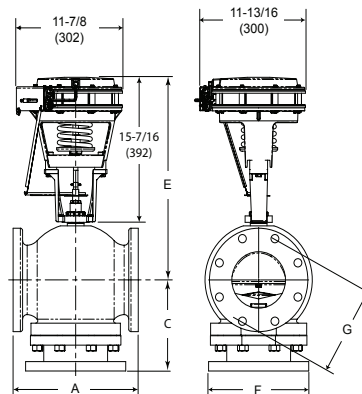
MK-6911 with Flanged 3-Way Globe Valves
